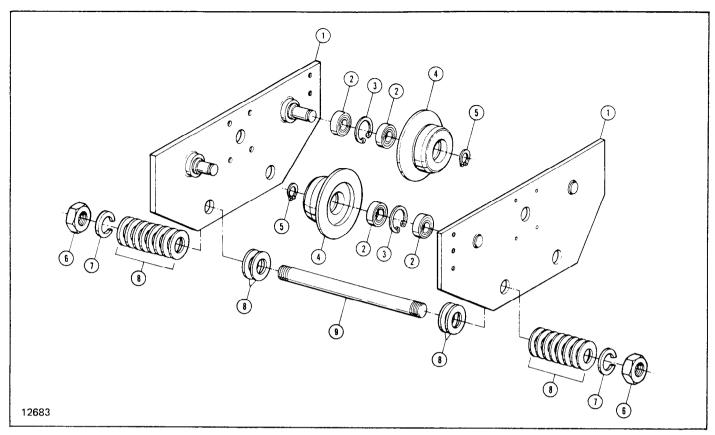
Push Type Rigid Mount Trolley Assembly - (4" ϕ Wheels - 6" c/c Pins) and Trailer Trolley* - (2 - 4" ϕ Wheels).
